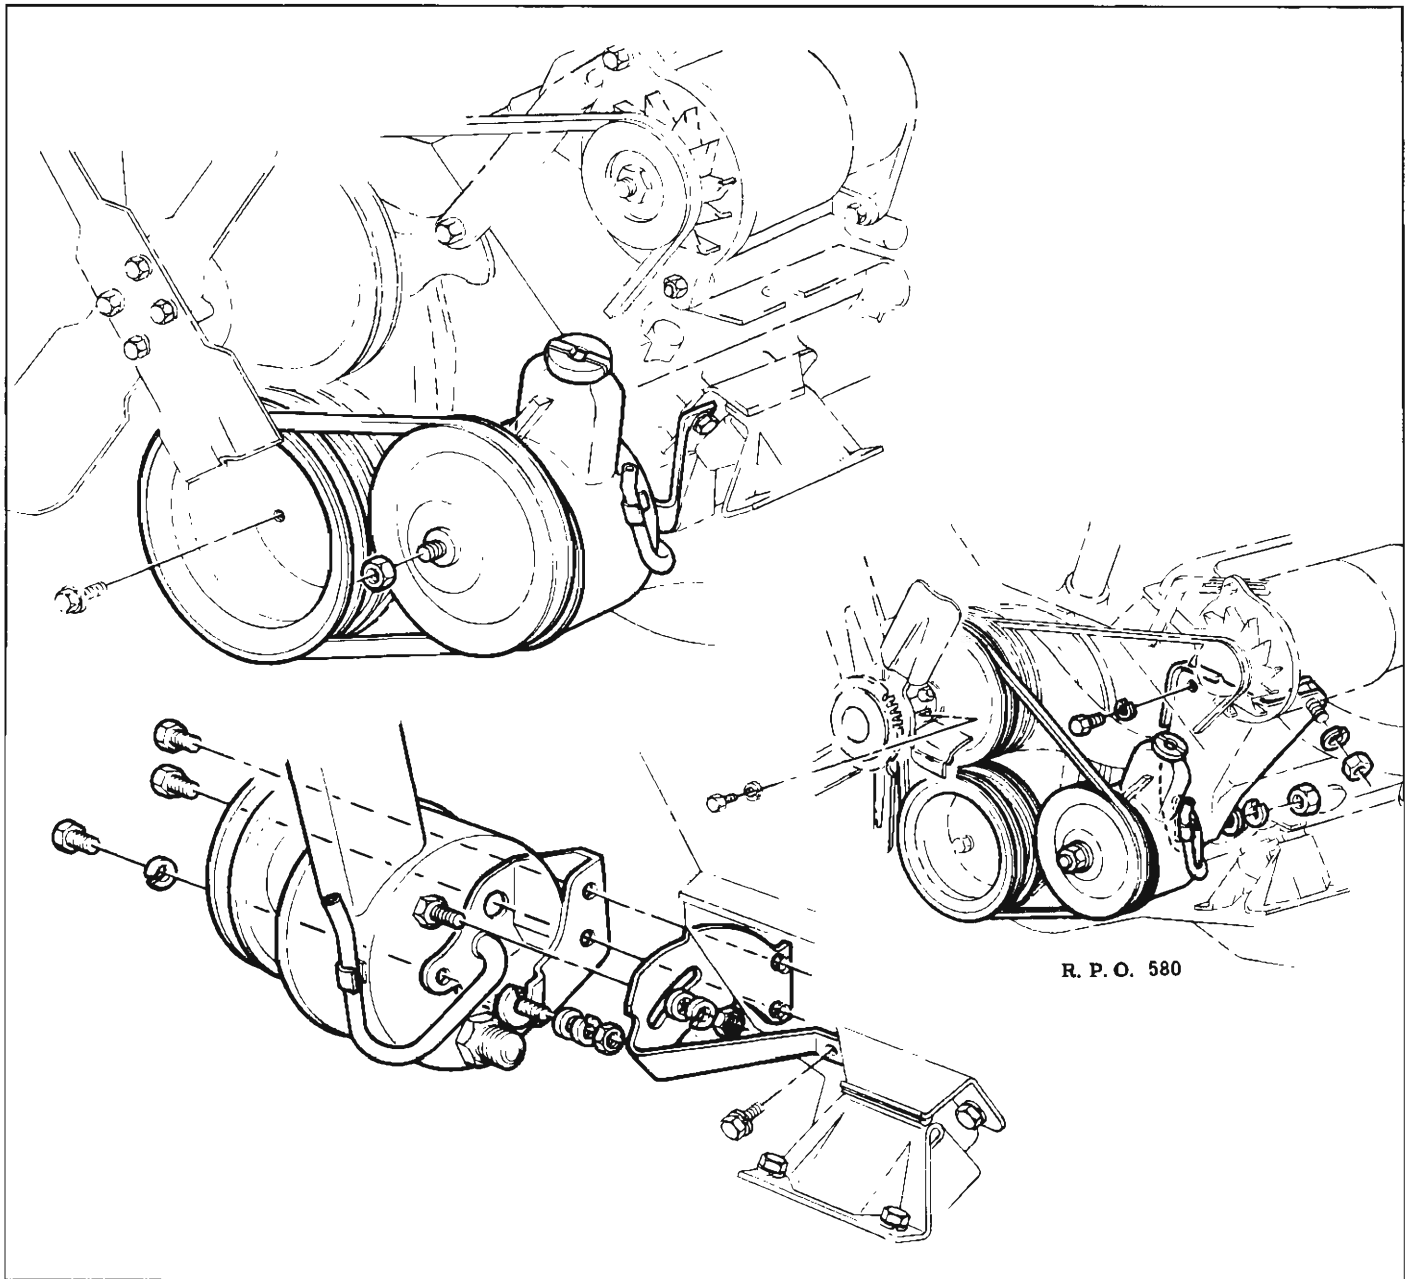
Power Steering Pump Installed—8 Cylinder Engine
